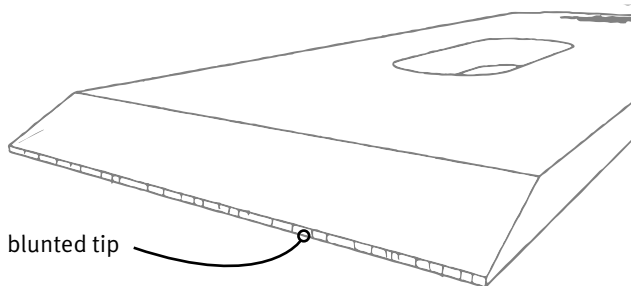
With the damage removed and the tip blunted, you can grind the bevel to its new shape without too much worry about overheating the steel.
